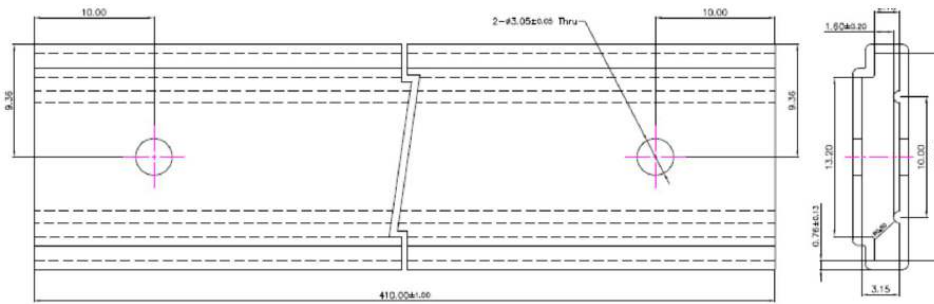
Tube dimensions for L2C5-xxxx1203F09P0.
